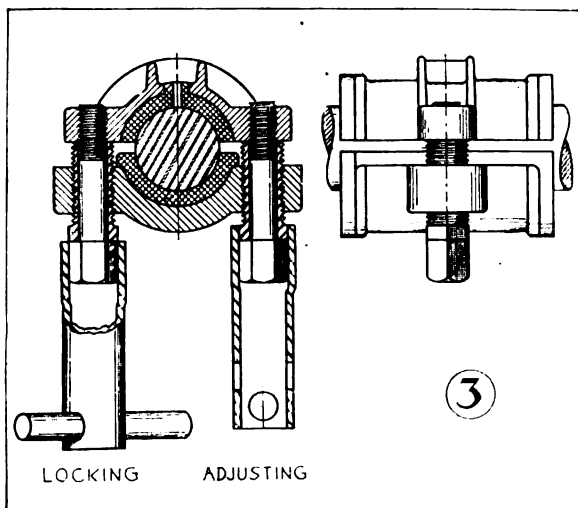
Adjusting engine main bearings. Slipping wrench on part way unlocks and on all the way adjusts the bearing
